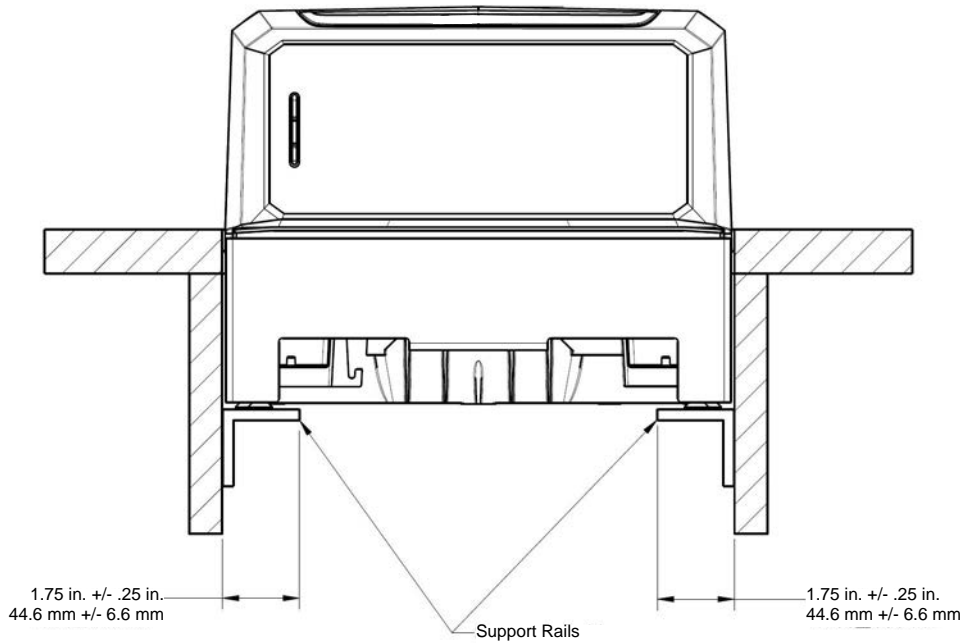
MP6000 - Short Unit (No Scale) Front View Dimensions
